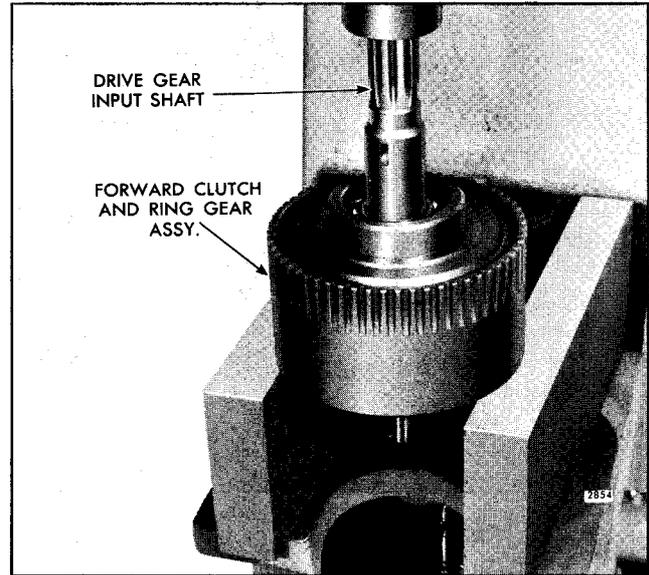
Removing Drive Gear Input Shaft from Bearing and Forward Clutch and Ring Gear Assembly
